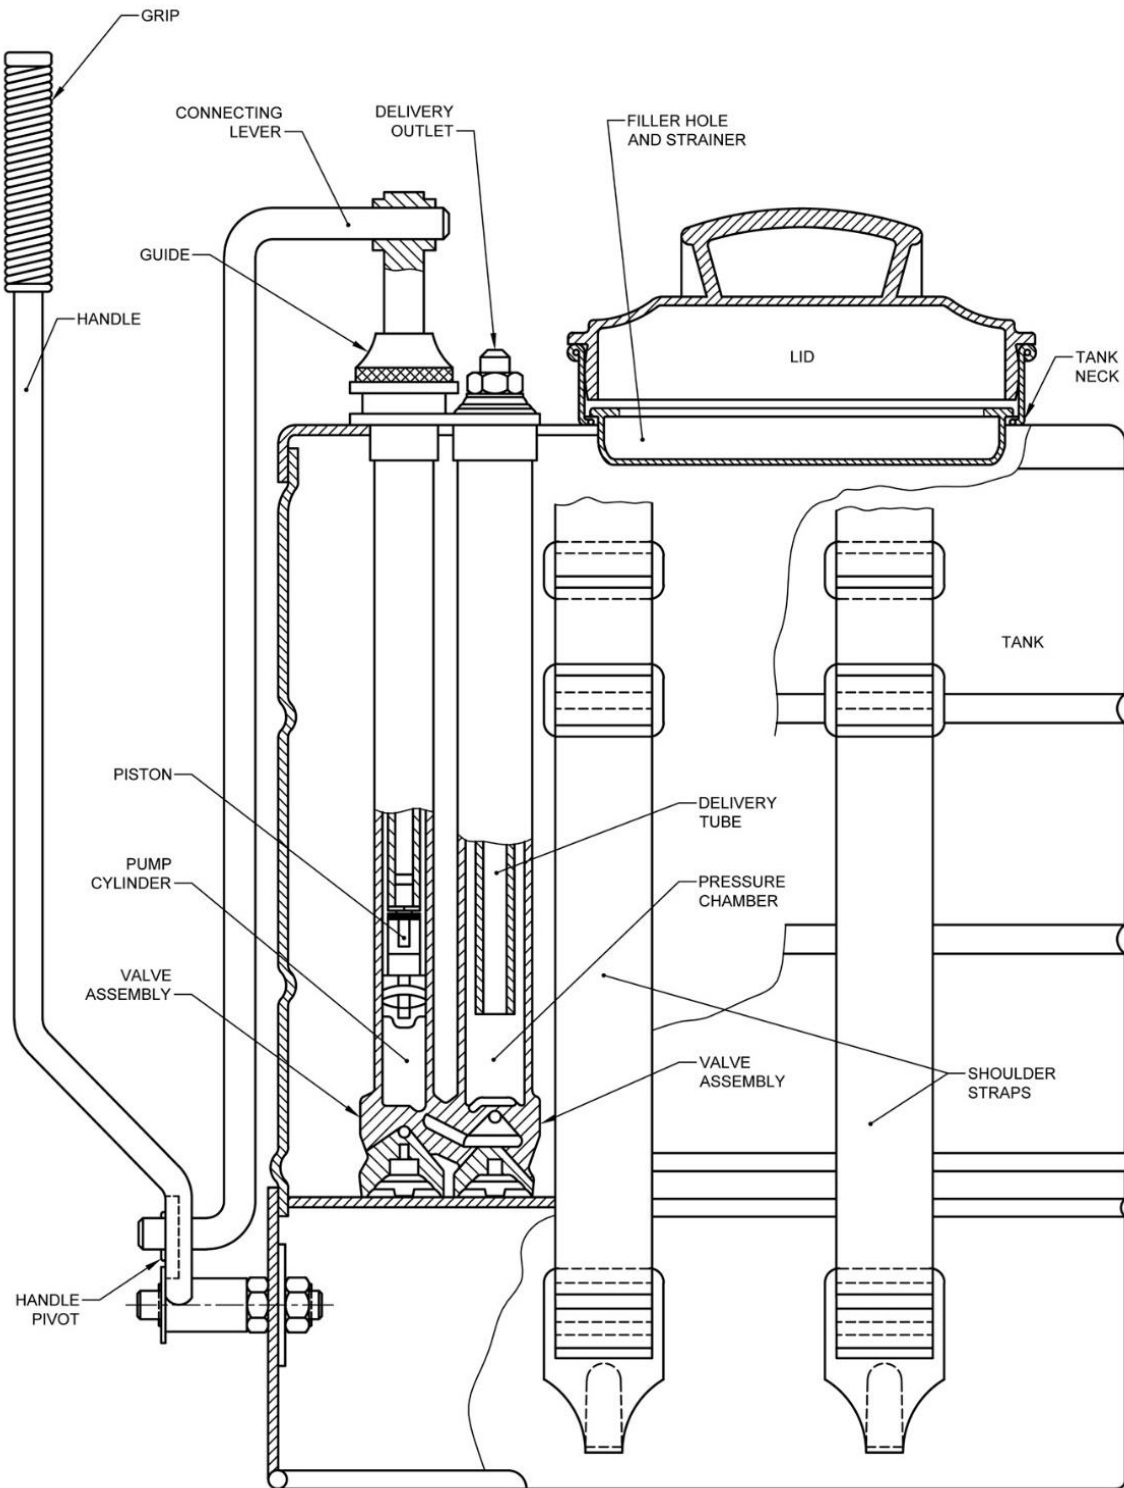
KNAPSACK SPRAYER, PUMP ASSEMBLY INSIDE TANK
